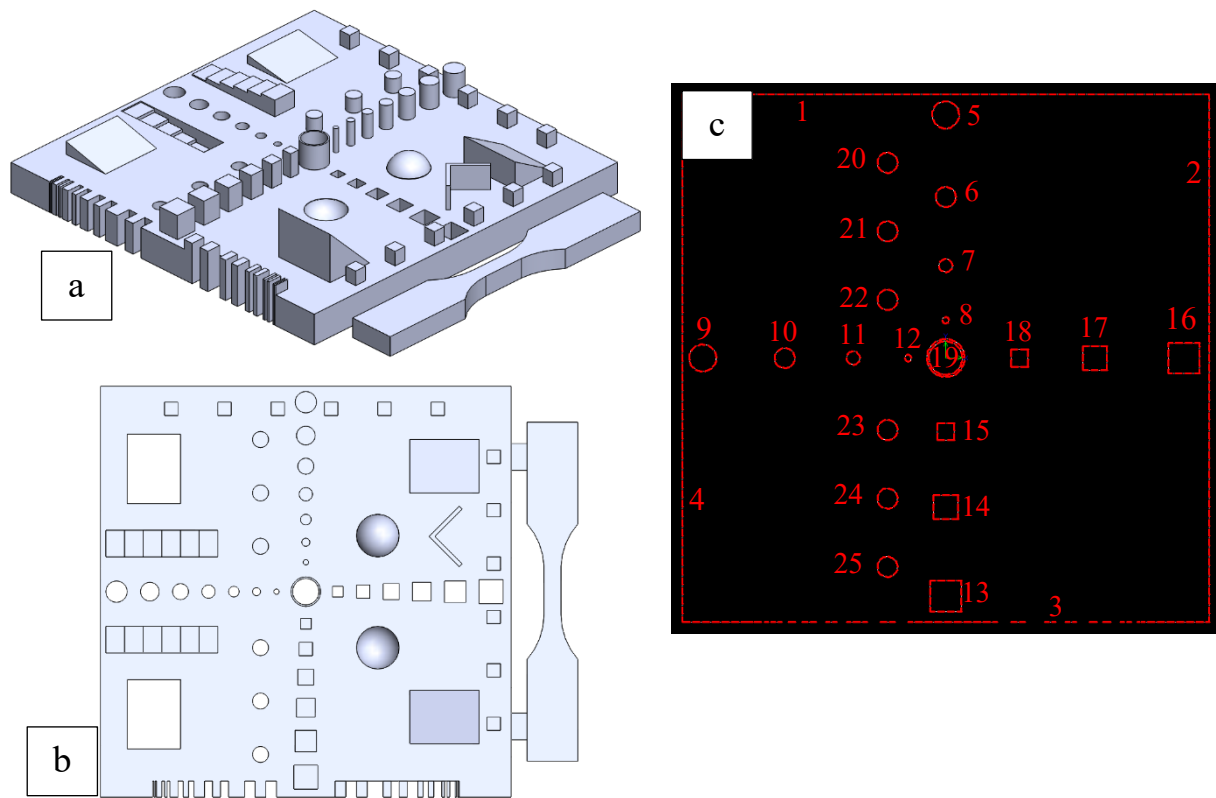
Modified version of CAD Ranking model (a) isometric view (b) top view (c) points of interests measured by the optical measuring tool.
